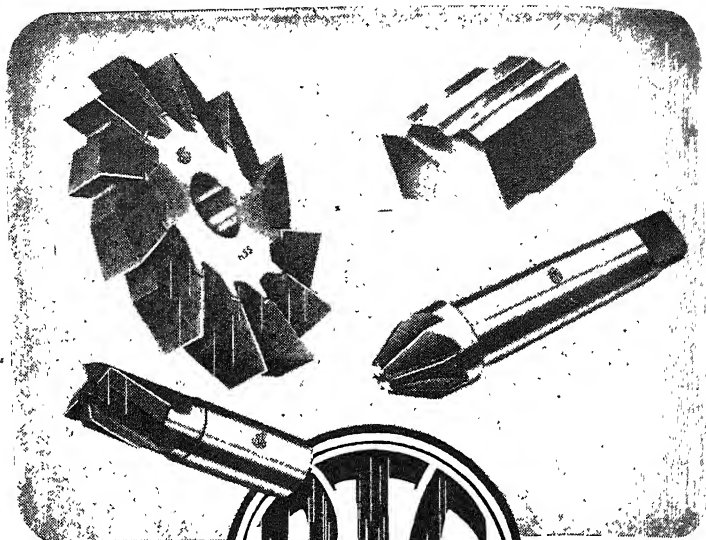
A further high-speed-steel cutting tool of solid type.
